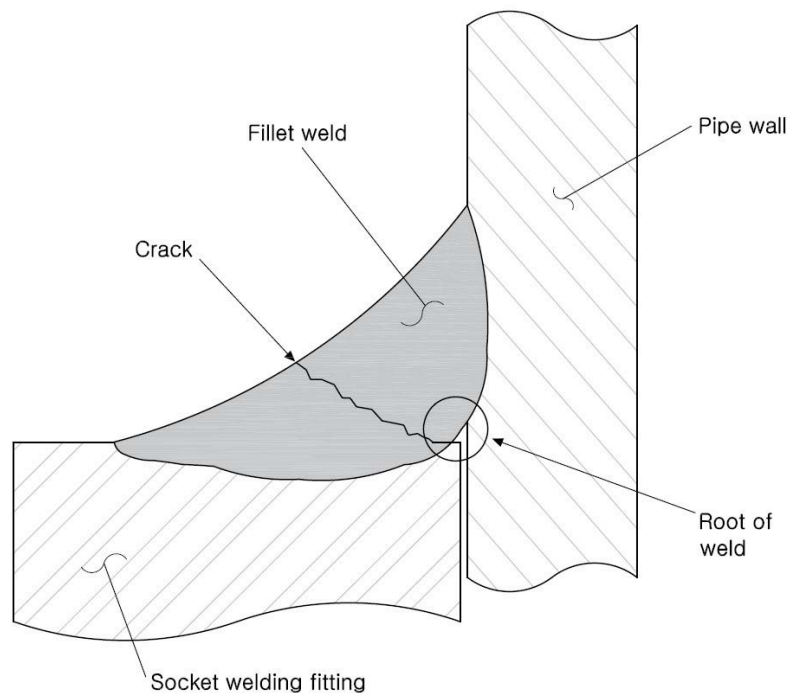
Sectional view of cracked fillet weld [45].
